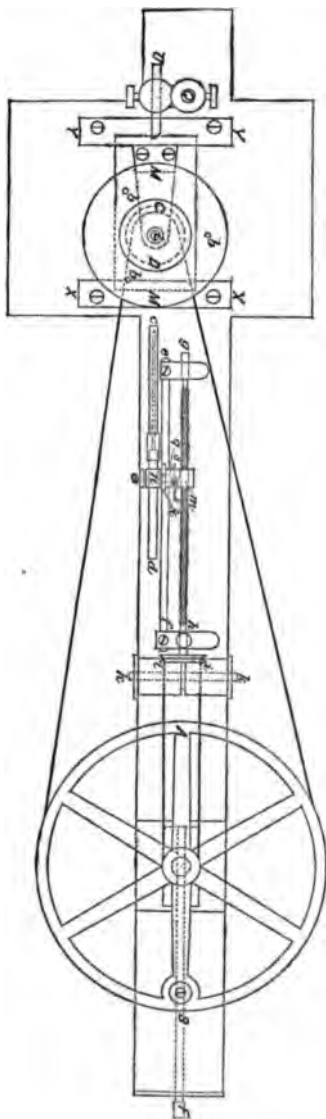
Machine for soldering porcelain; plan. Scale 1/2.
